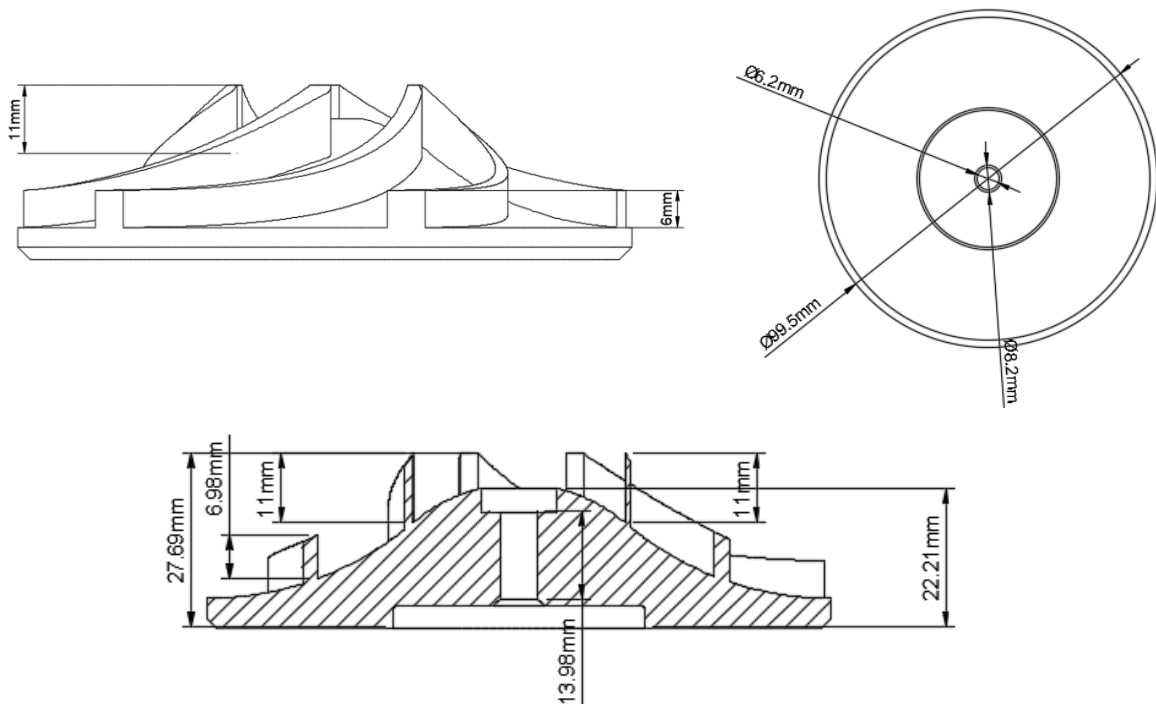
, 2.15 & 2.15.2: Front and top view impeller dimensions
